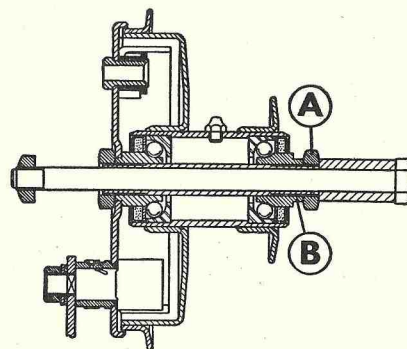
METHOD OF ADJUSTING 200-C.C. MODEL LH FRONT HUB.
